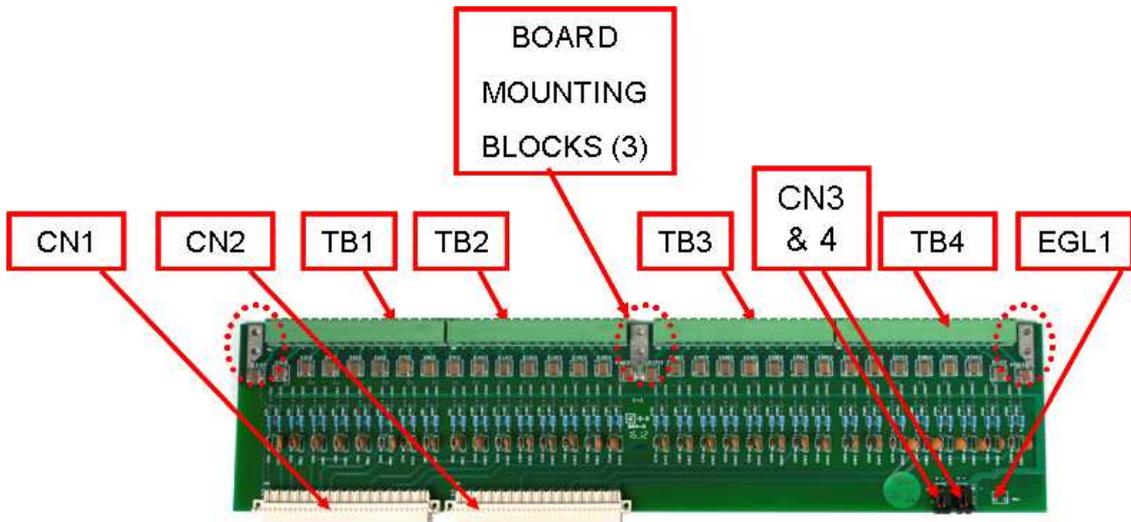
High-Voltage Digital Board (Dual Board Assembly) – Top Side
